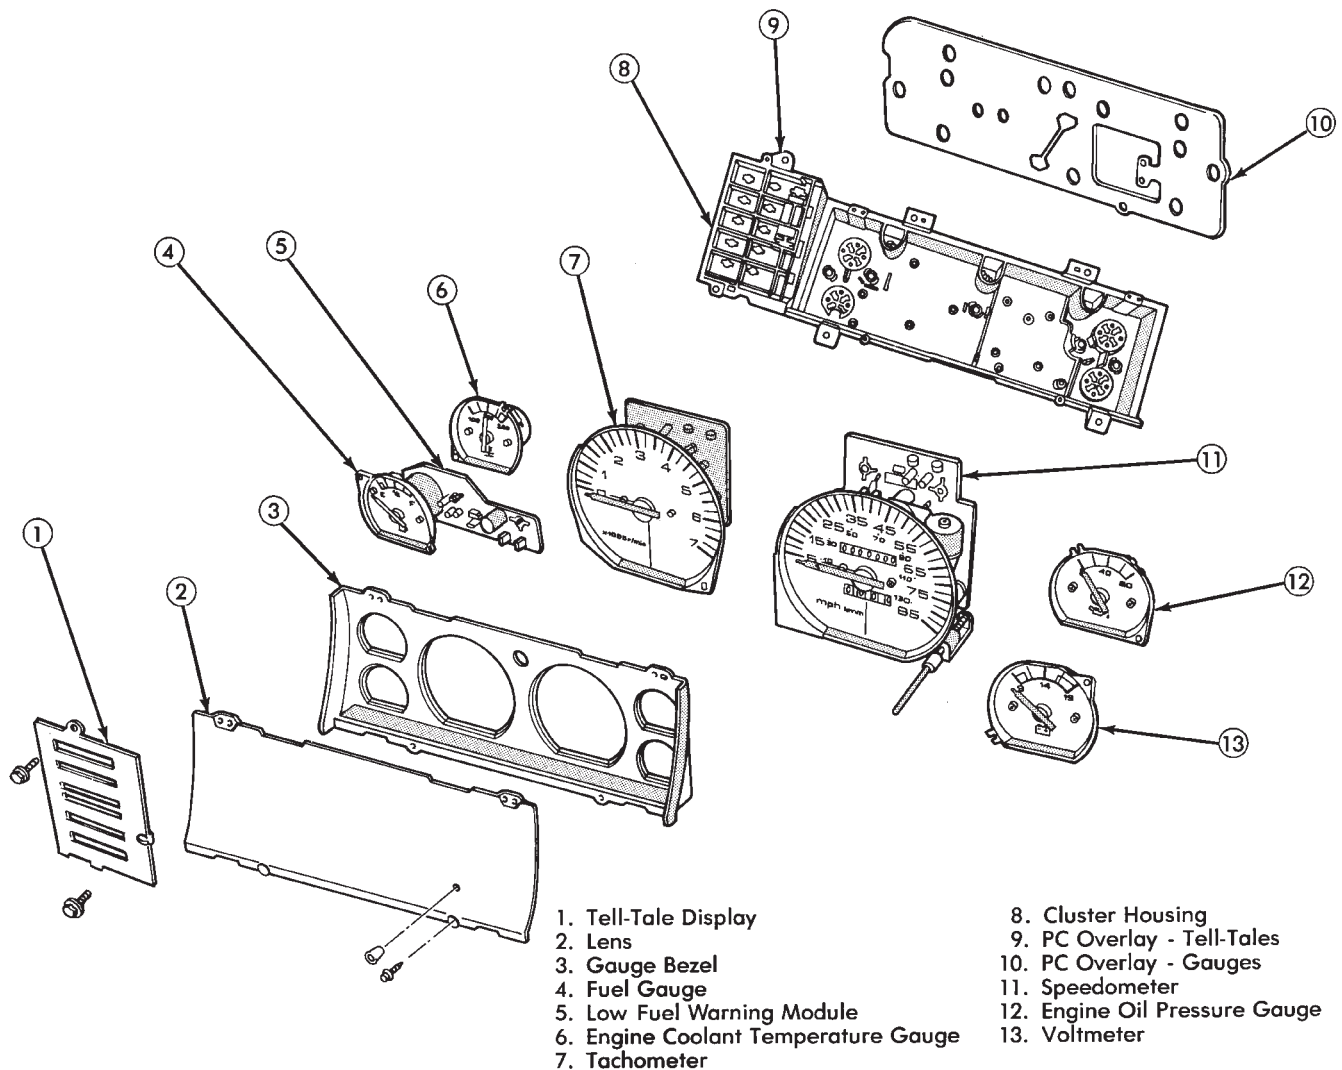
Instrument Cluster Removal/Installation—XJ
